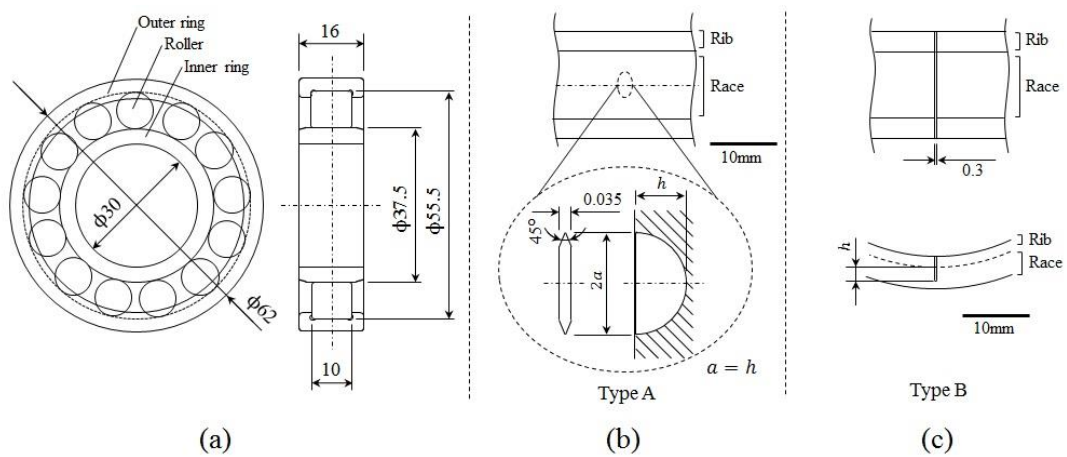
Shape and dimensions of bearing test specimen, in mm: (a) test bearing NU206, (b) Type A defect, (c) Type B defect.
